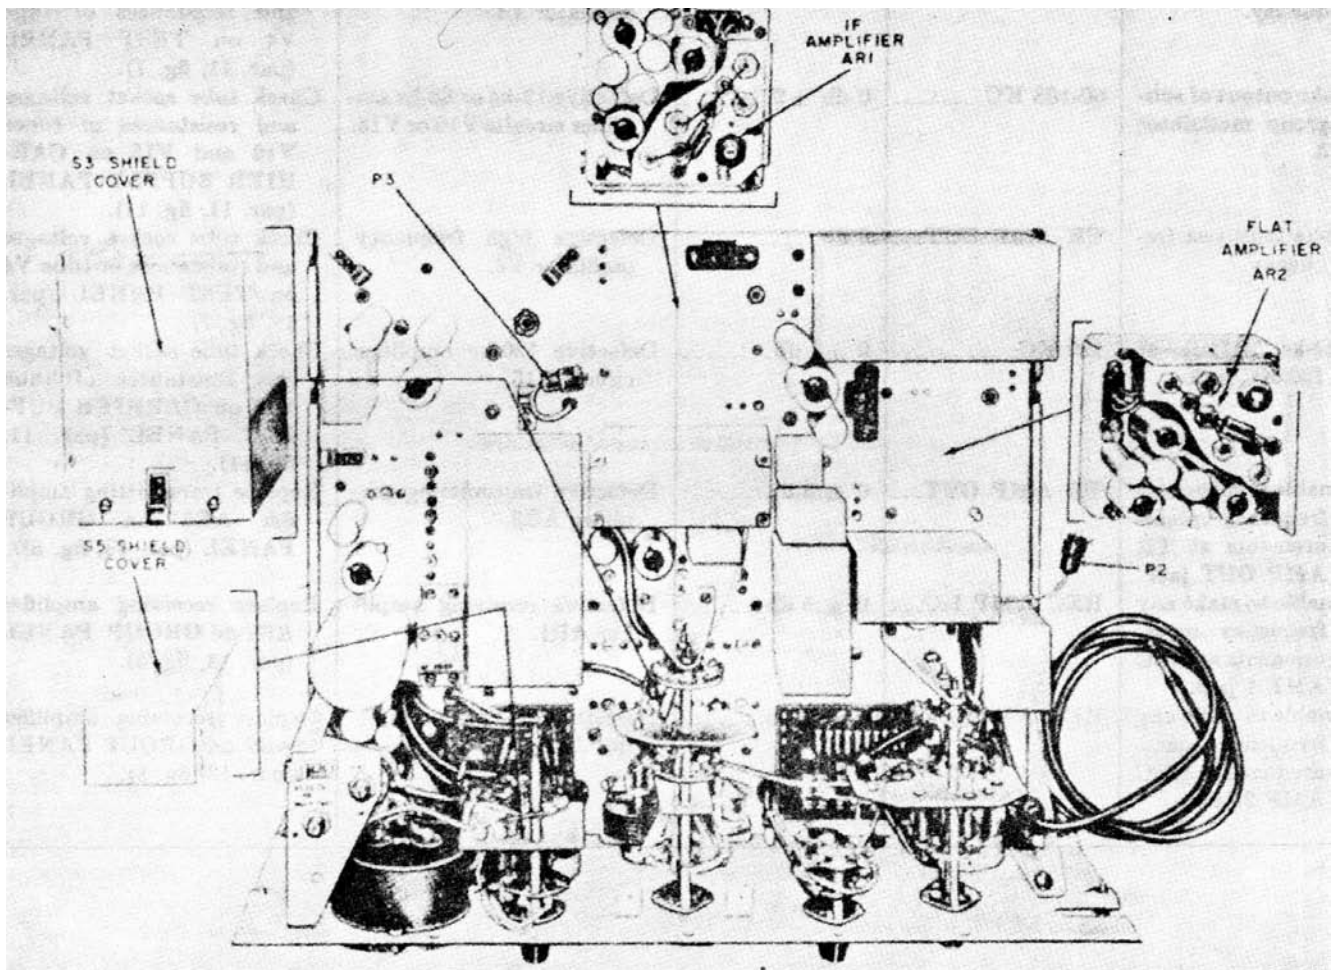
Telephone Test Set TS-760/TCC-7, top view of chassis, location of plug-in assemblies.
